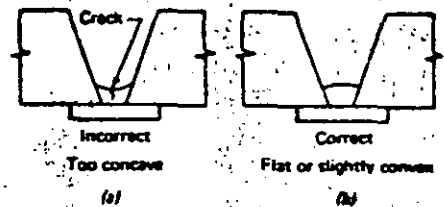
A concave root pass (a) may crack because tensile stresses exceed the strength of the weld metal. A slightly convex root-pass bead (b) helps prevent cracking.
